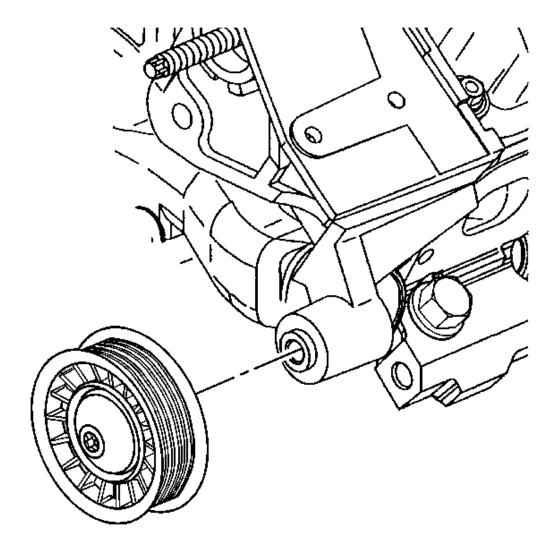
View Of Supercharger Drive Belt Courtesy of GENERAL MOTORS CORP.
